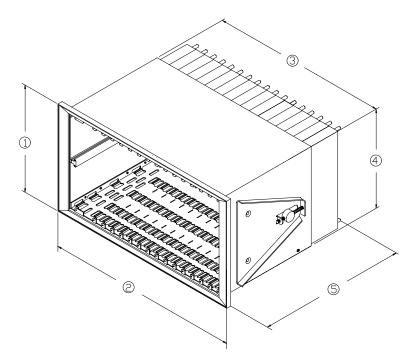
Dimensions of a Panel Mount 3500 Full-Size Rack
